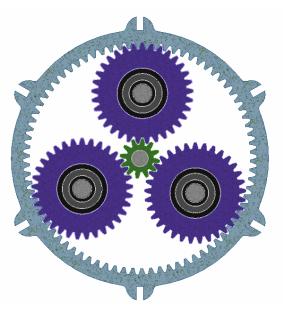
Planar view of the layer containing all gear components, showing the ring gear on the inner surface of the housing housing (light teal), and the sun (green) and planet gears (dark purple).
